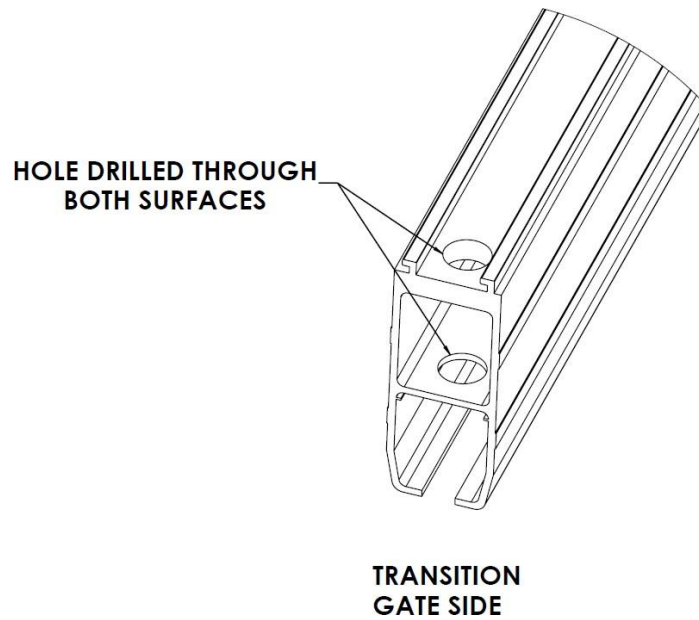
TrackPlus Track - Hole Drilled Through Both Surfaces
